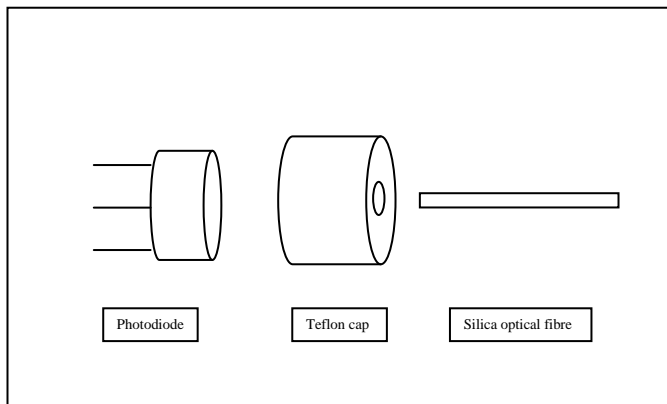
Schematic drawing representing the assembly of coupling photodiode to silica fibre.
